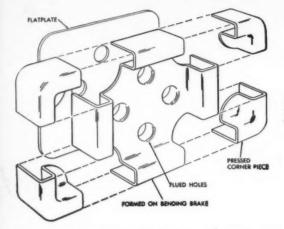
Exploded view of the water cooled furnace door, showing construction.
